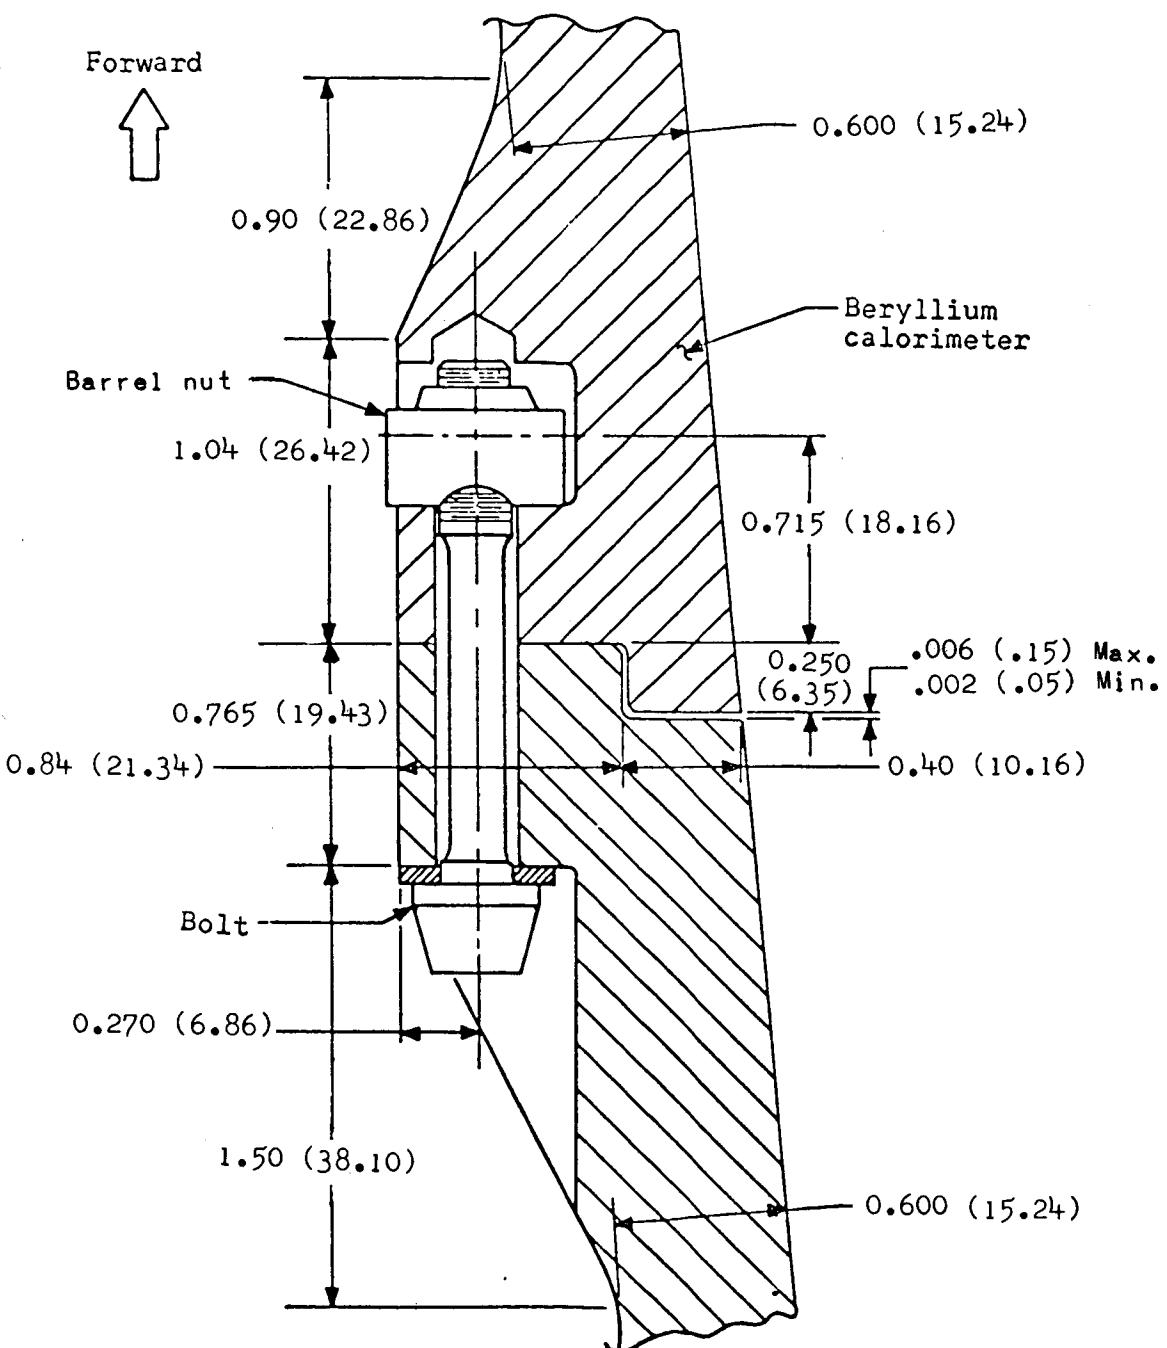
Typical calorimeter bolted joint. All dimensions in inches (millimeters).
